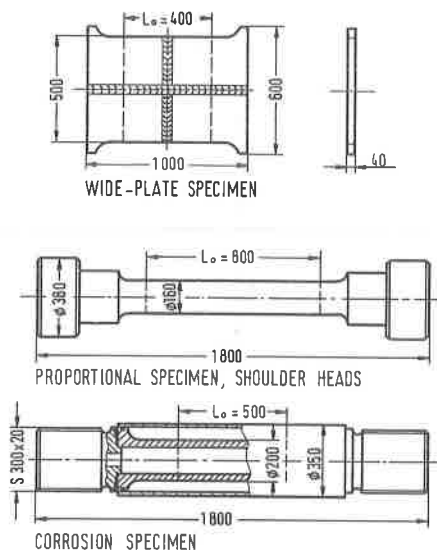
Specimens for 12 MN-High Speed Tensile Machine
